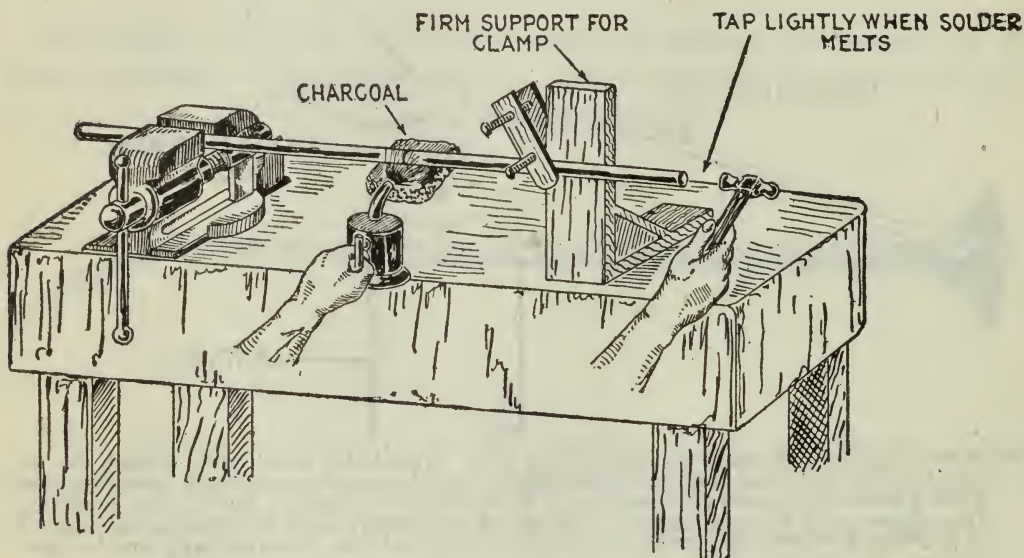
,465.—Butt brazing two lengths of small pipe. After cleaning the ends to be brazed and fluxing, they are clamped in position butt to butt using a vise and clamp as shown, or other means. A little brazing solder is sprinkled over the joint and heat applied. When the pieces are hot enough to melt the solder it must flow into the joint, butt brazing the two pieces. By giving one of the pieces a slight tap on the end, when the solder melts, the surplus solder is squeezed out, making a good and firm joint. If the pipes be large or of considerable length, the heat is quickly conducted away, necessitating a charcoal backing or more adequate means of heating.
